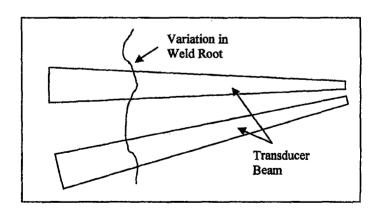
Lack of Fusion and Penetration at the weld root.
